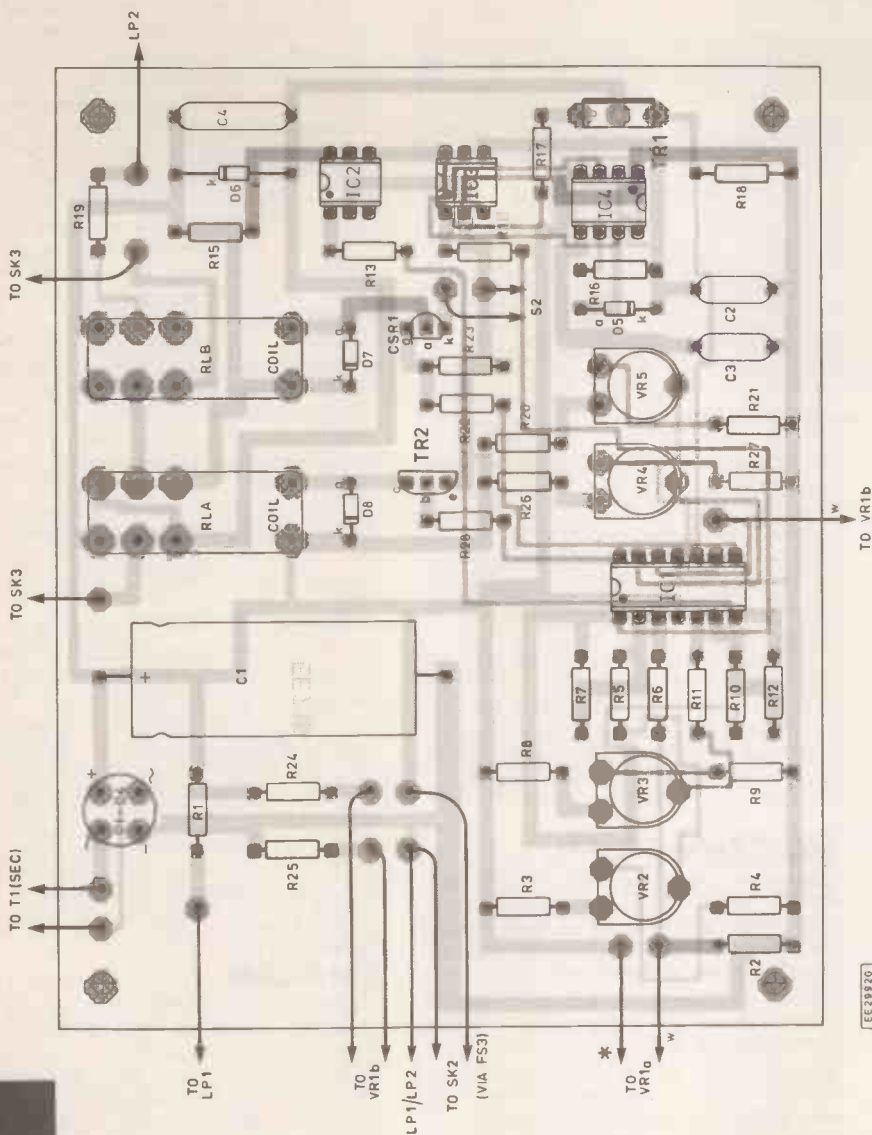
Printed circuit board component layout. The two different tints refer to the copper tracks on both sides of the board. The lead to VR1a marked with an asterisk is connected to both of the outer tags and the lead marked with a 'w' goes to the centre (wiper) tag.
